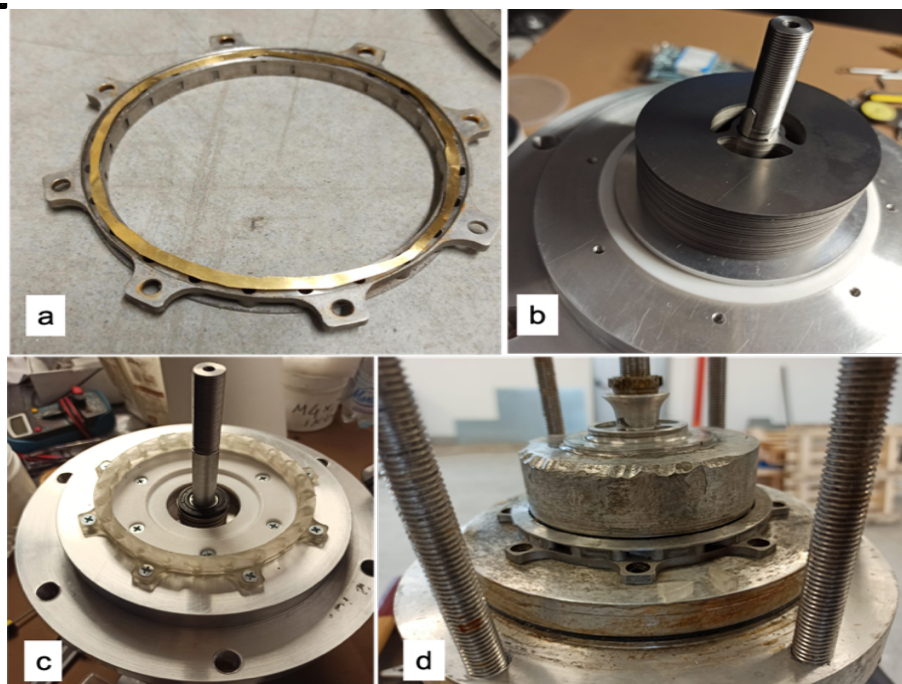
Water Tesla expander components: (a) metallic stator, (b) rotor assembly, (c) rotor with plastic stator, (d) rotor with the metallic stator (balancing removals are visible)
